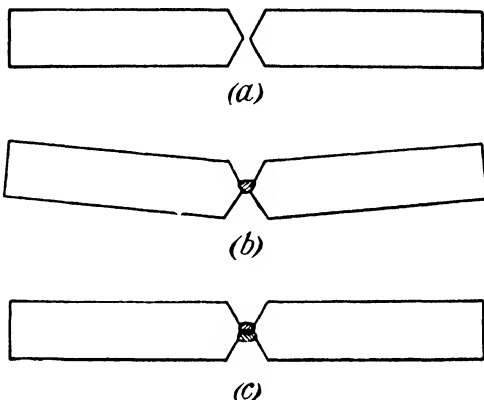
PULL OF WELD ON ONE SIDE OF VEE COUNTERACTING WELD ON OTHER SIDE
